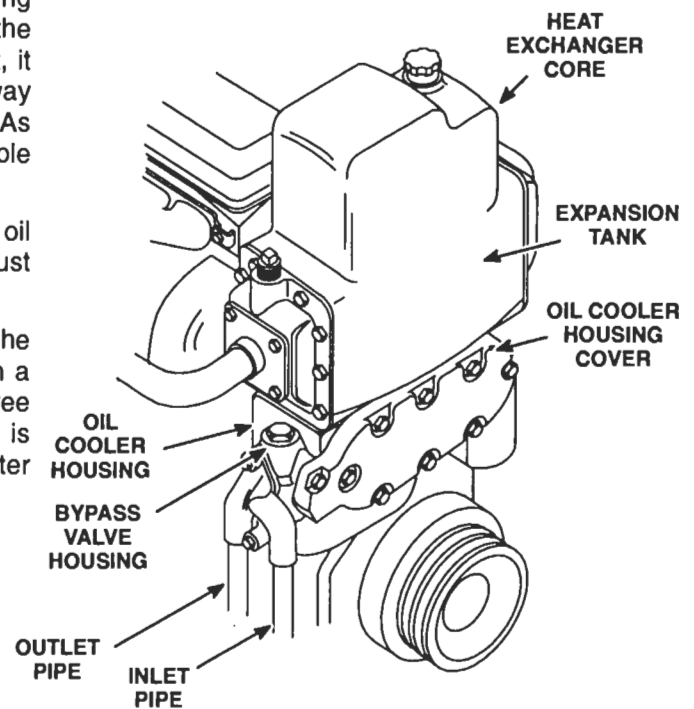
Lubricating Oil Cooler and Bypass Valve Details and Part Locations
